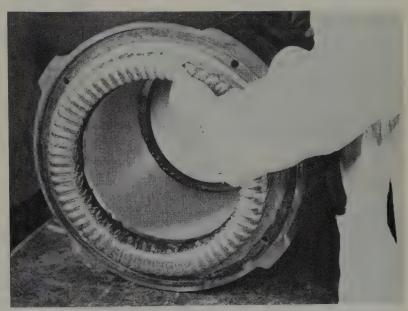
, installing stainless steel bore line into 40 hp pump motor.
